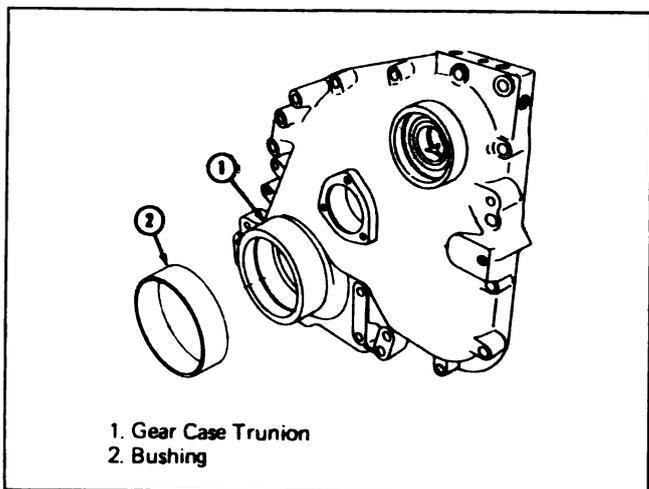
(N10145). The Gear Cover And Trunnion Bushing.
